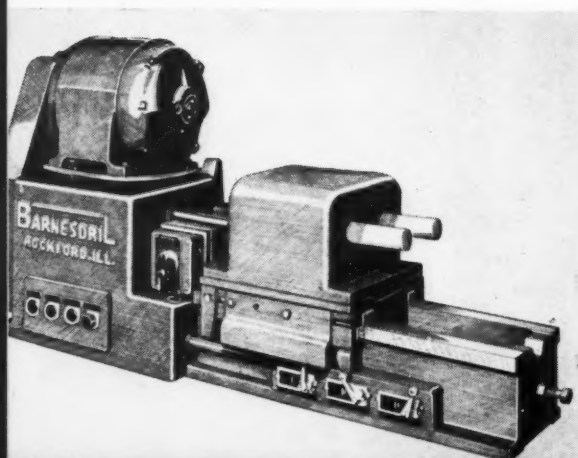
Barnes Drilling Machine with Twelve Speeds and Nine Feeds
